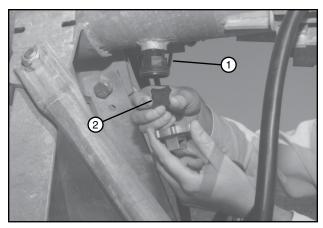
1. Pipe Drain 2. Rubber Seal
